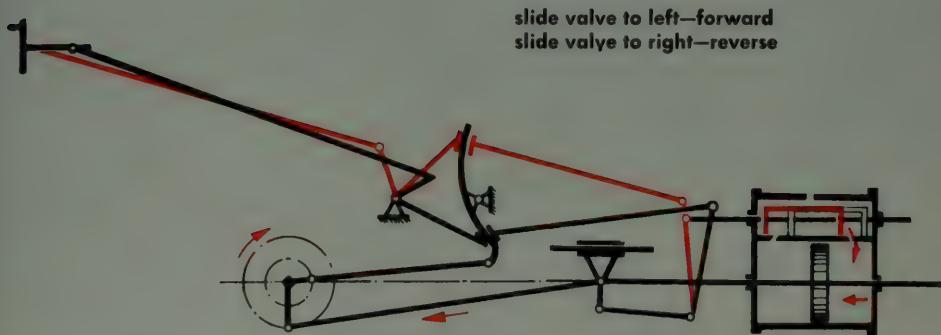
DIAGRAM SHOWING SLIDE VALVE ADJUSTMENT (Heusinger system)
